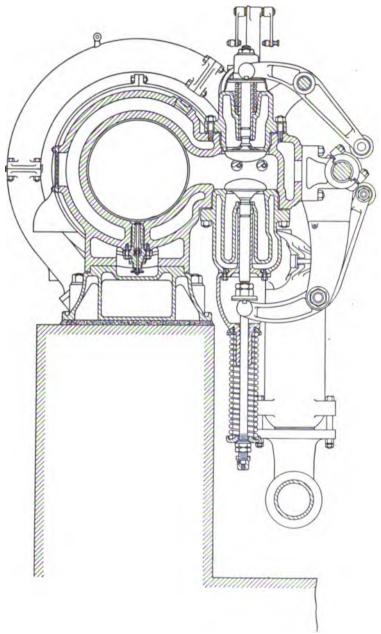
Section Through Combustion Chamber. Snow Gas-engine.
